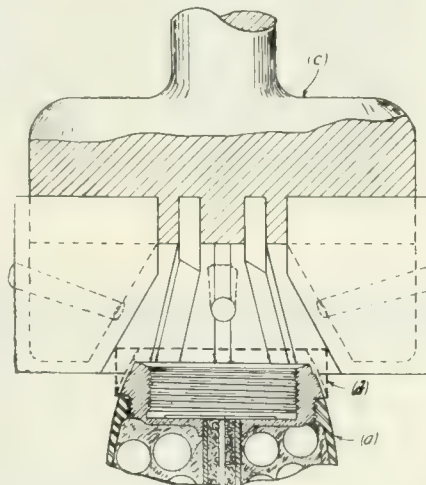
HOLLOW MILL FOR SOCKET TIGHTENING MACHINE.
